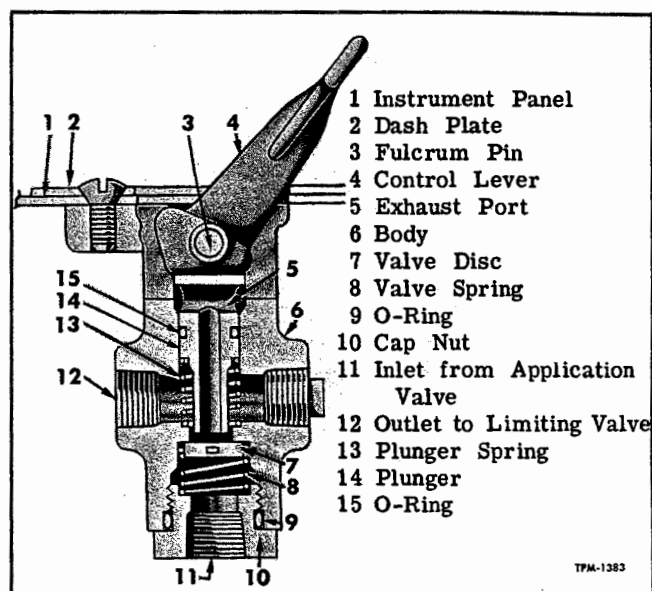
Two-Way Control Valve (Also I.C.C. Valve)
